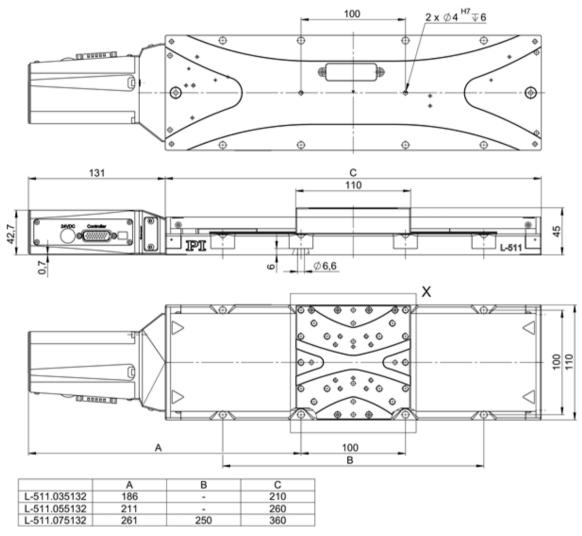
L-511 versions with BLDC motor and rotary encoder, dimensions in mm
